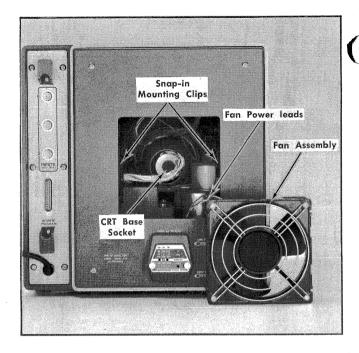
Fan Assembly removed from the fan snap-in mounting.
